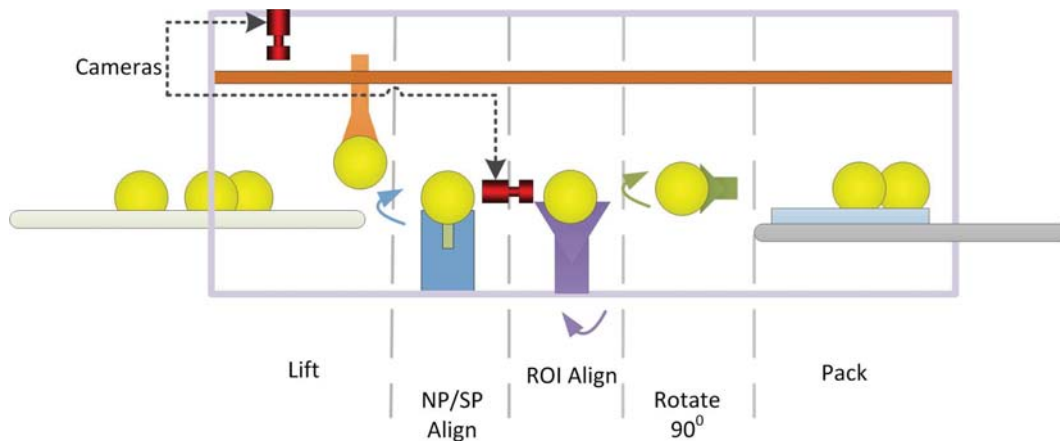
Existing system 6, demonstrating the staged layout of packing OBJs with organised layout.
